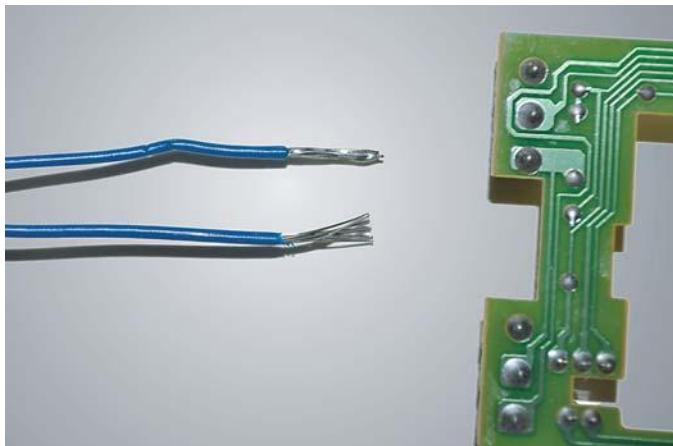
An un-tinned wire below, pre-tinned wire above.
